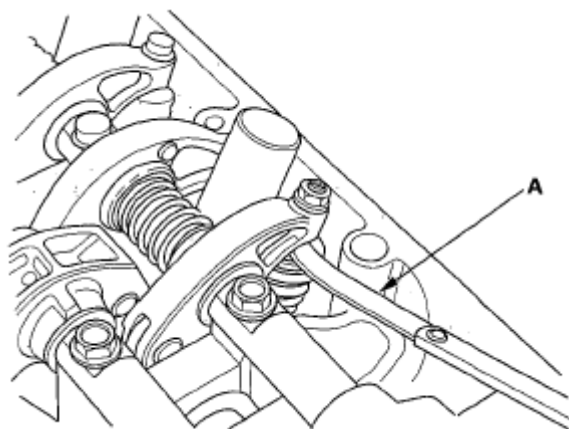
Identifying Feeler Gauge Between Adjusting Screw And End Of Valve Stem - Front
